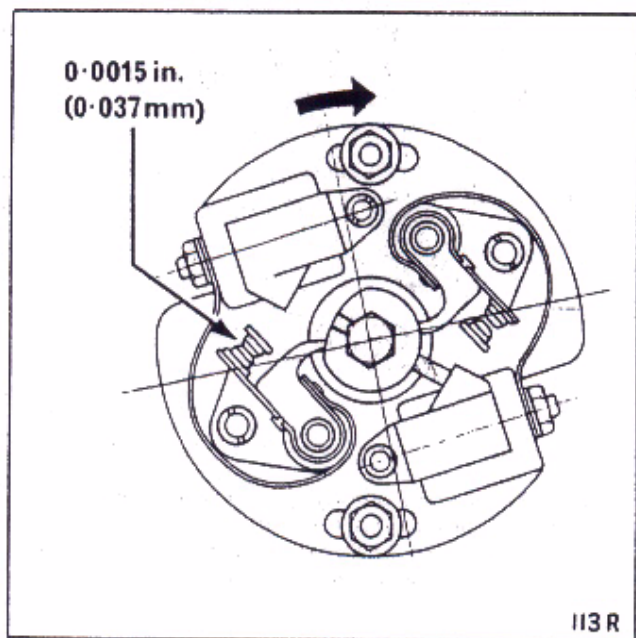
(a). Contact breaker points just opening on the right cylinder. With the engine set at the correct STATIC SETTING, the C.B. back plate assembly should be adjusted in the slots, to a position where the C.B. points just commence to open.
